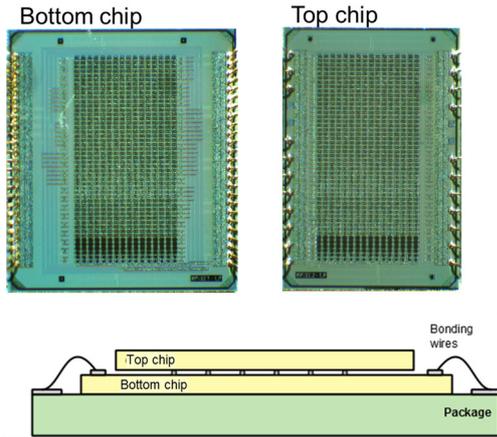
Chip micrographs and concept drawing of the vertically-integrated assembly.
